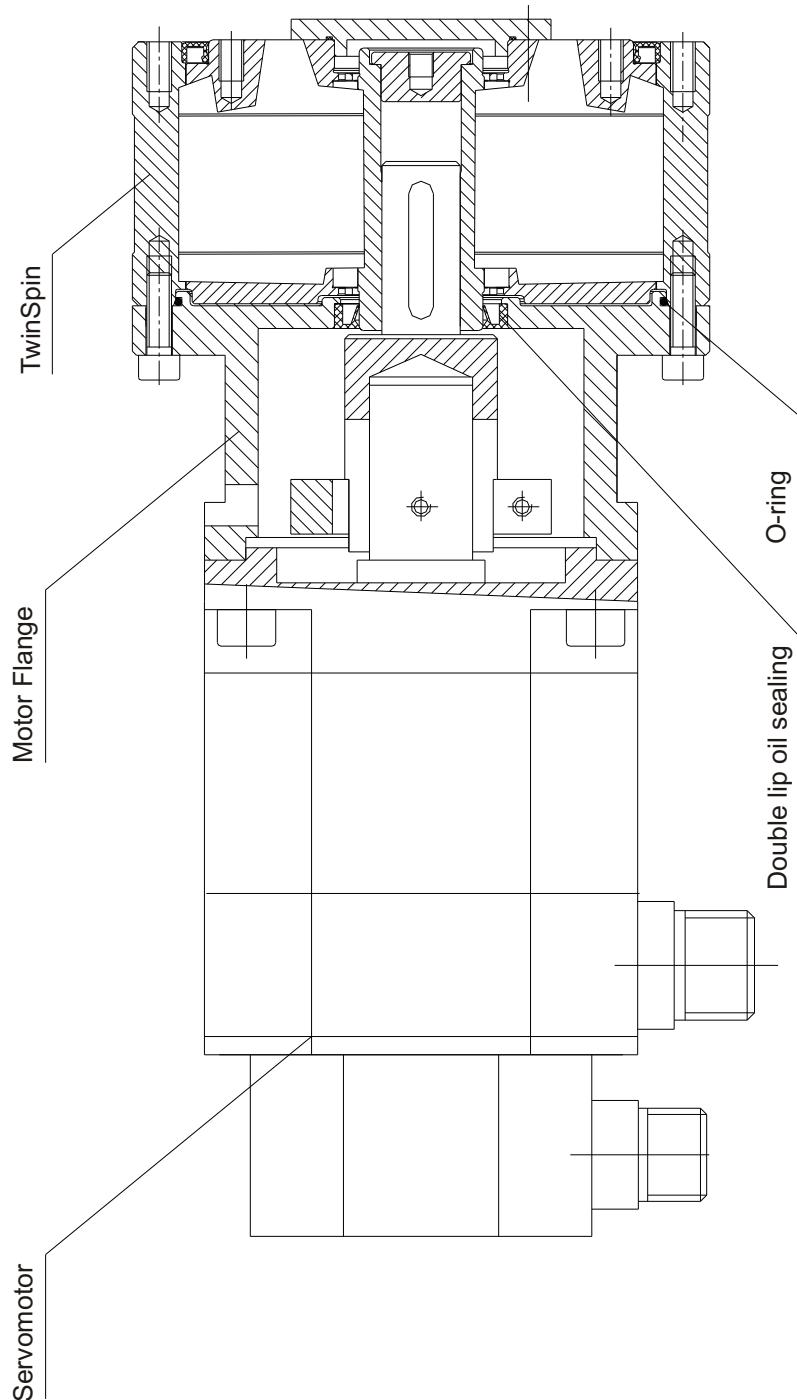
Typical installation example / Typische Anbauanwendung
